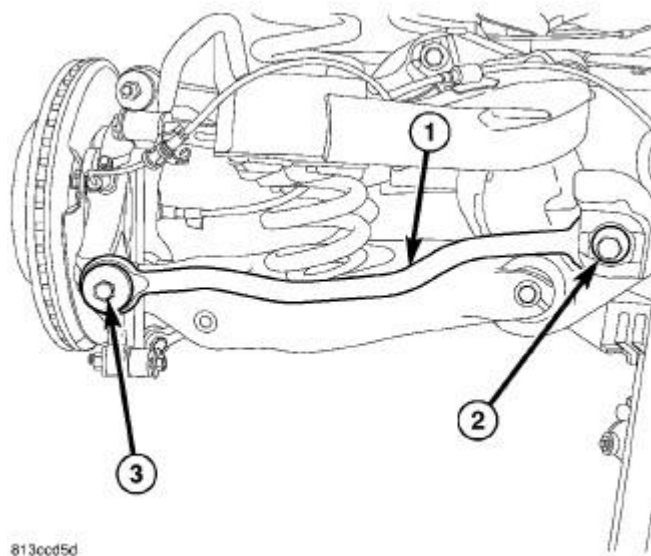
Toe Link, Mounting Bolt & Cam Bolt
